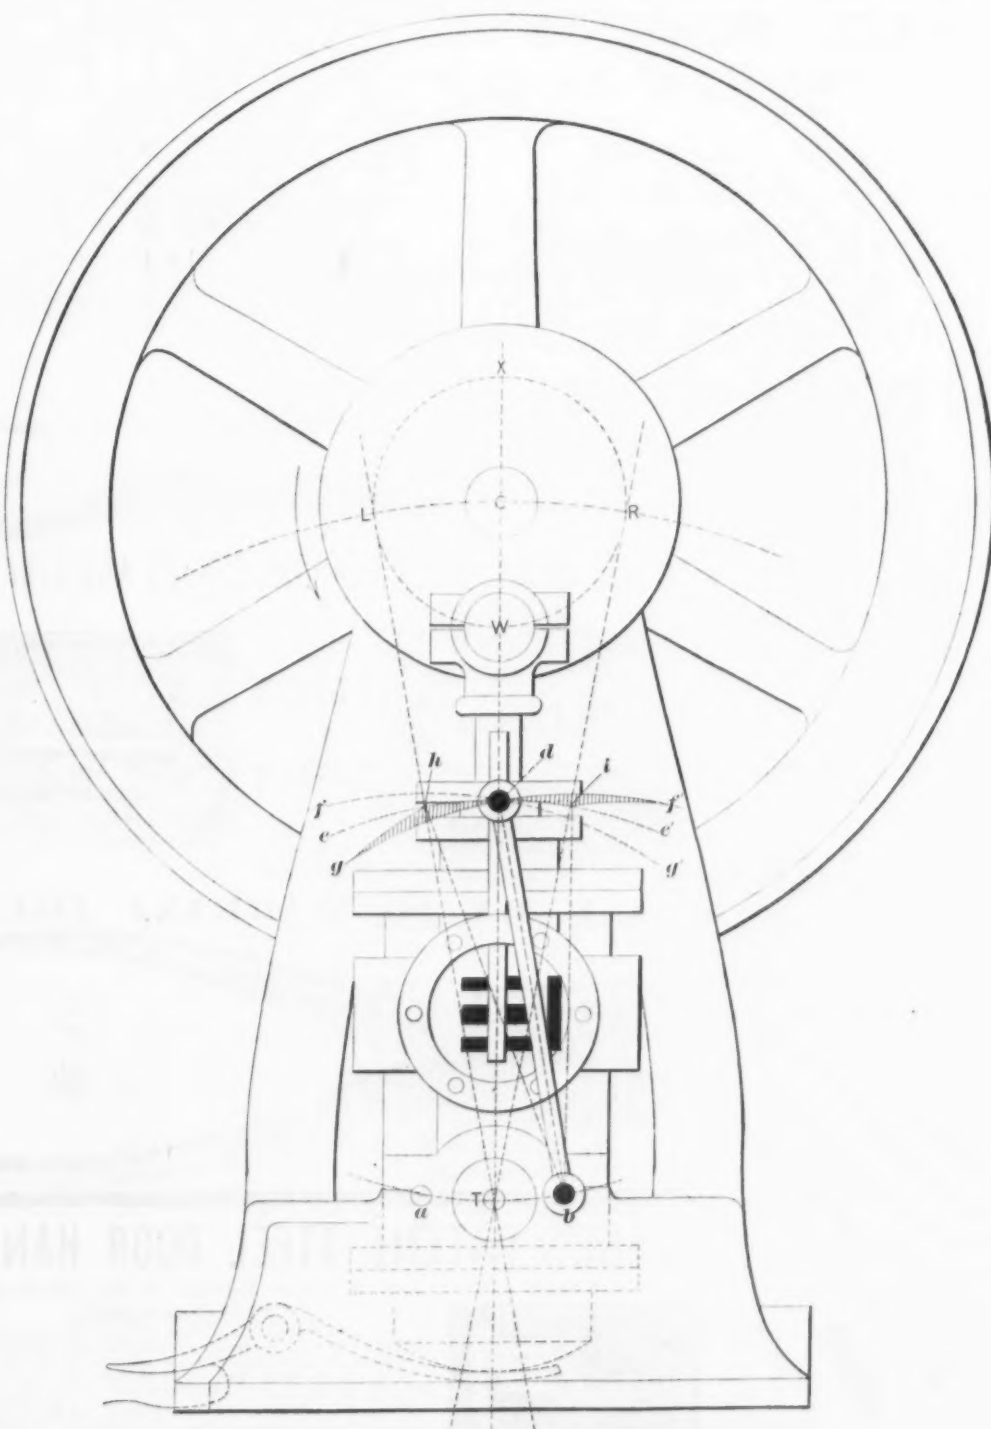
Elevation, Showing Arrangement of Valve Gear.
